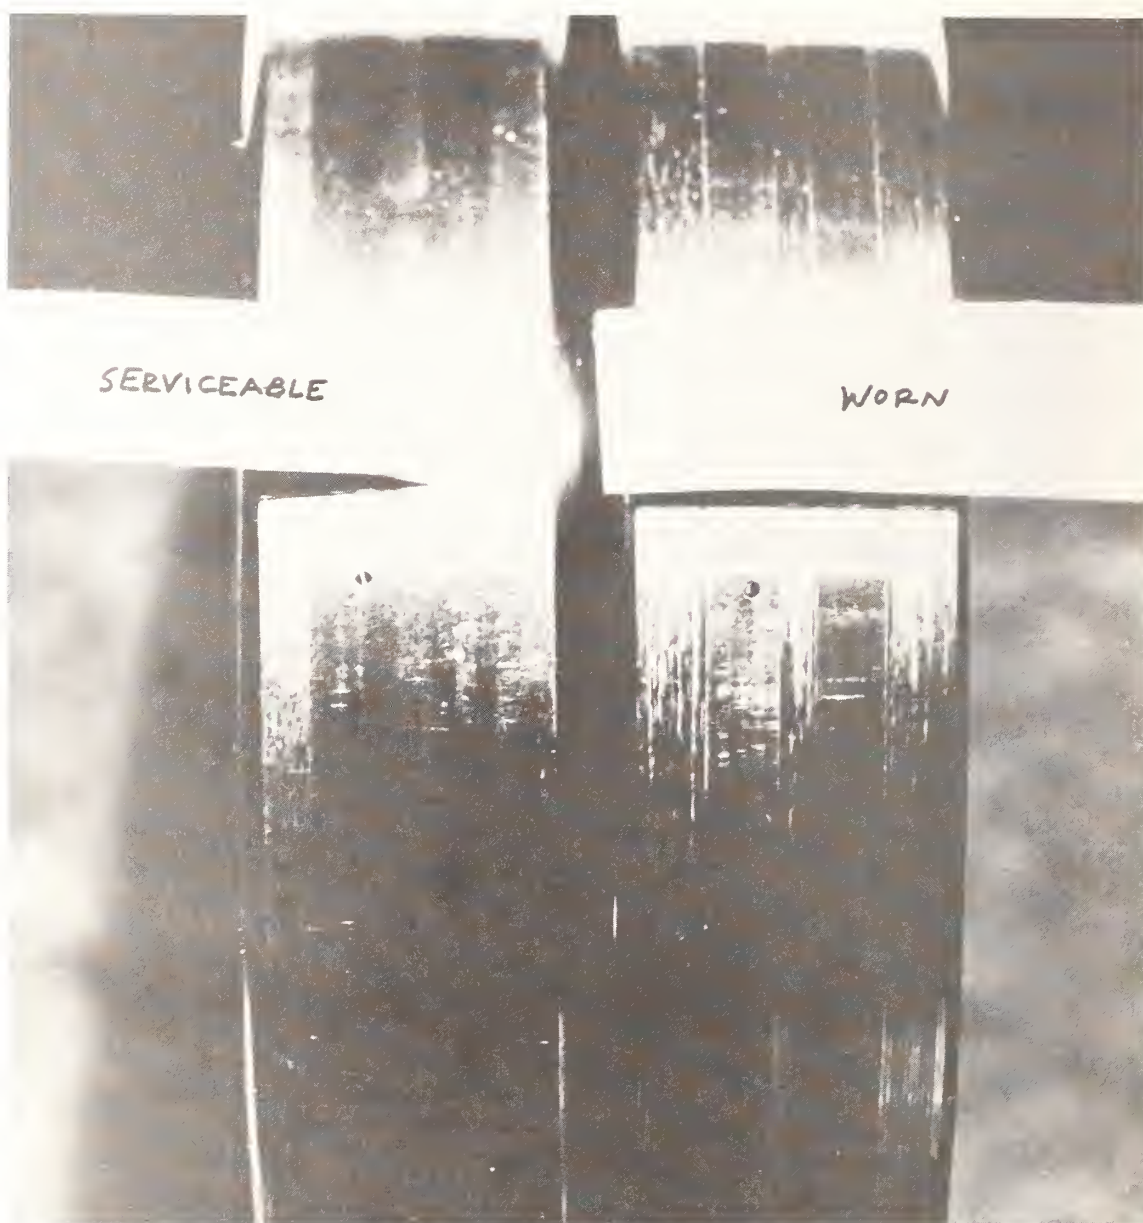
ROTATING NO. 2 BEARING, T-53 ENGINE
